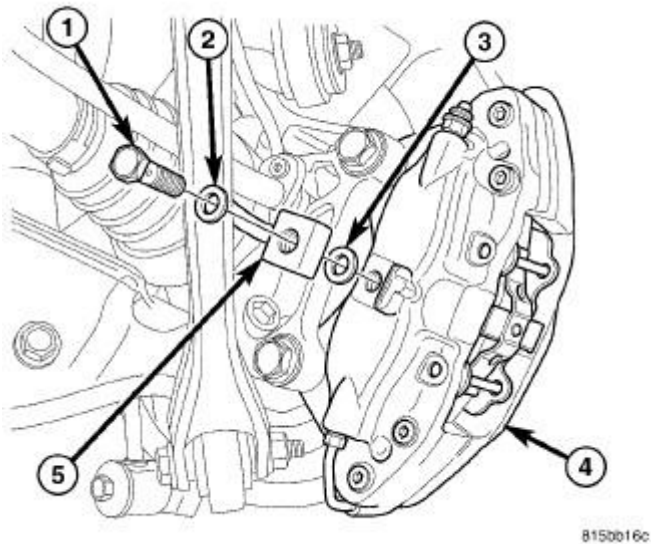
REAR FLEX HOSE CONNECTION - SRT8
